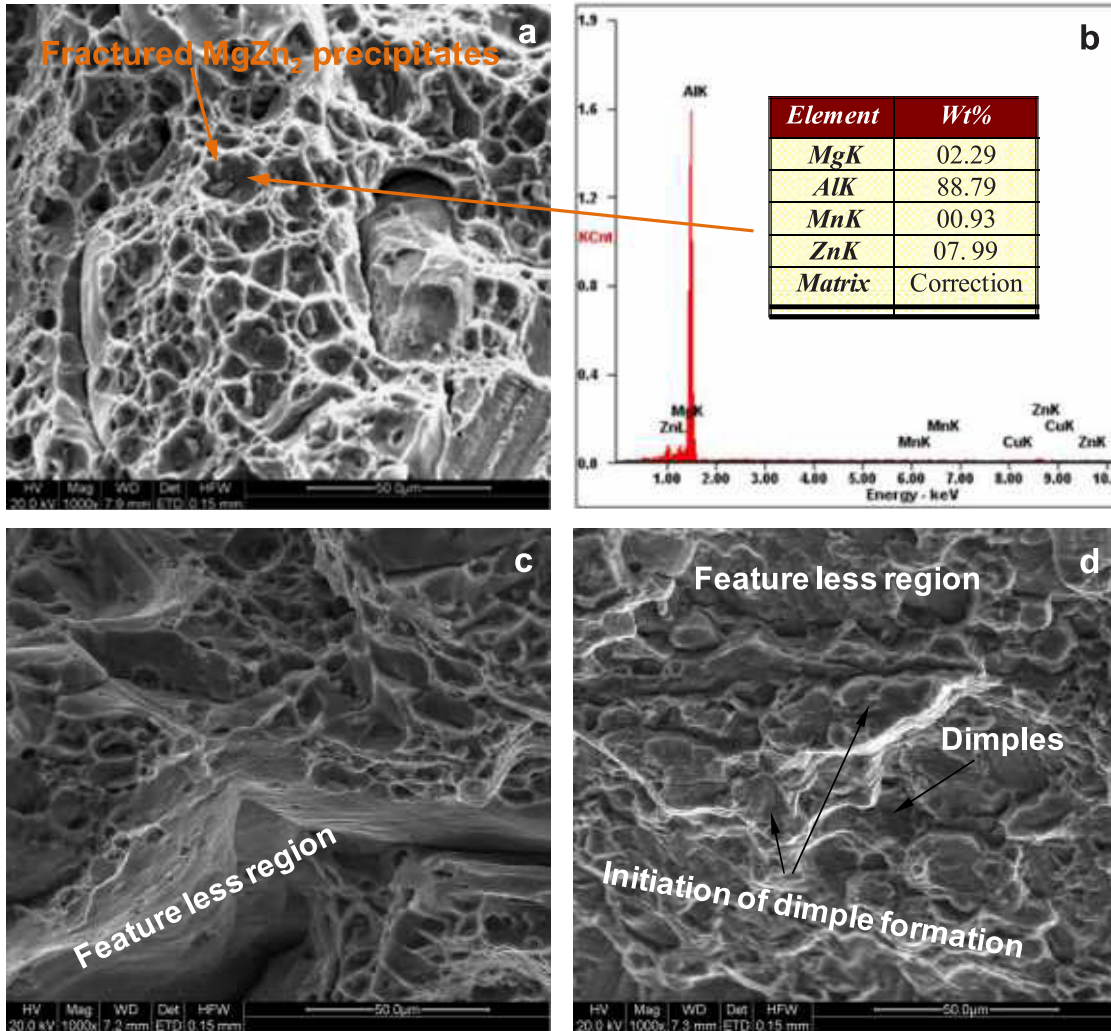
Fracture morphology of (a) top, (c) middle, (d) bottom layer of FSW joints and (b) EDAX analysis of fractured precipitate
